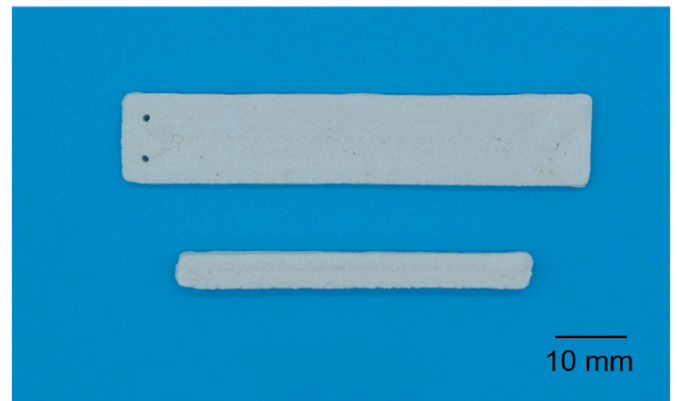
3D printed plate after sintering at 1600 °C, final printing parameters.
